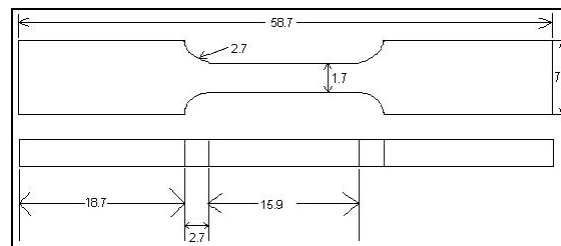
Mini-tensile specimen dimensions (mm). After [13]
